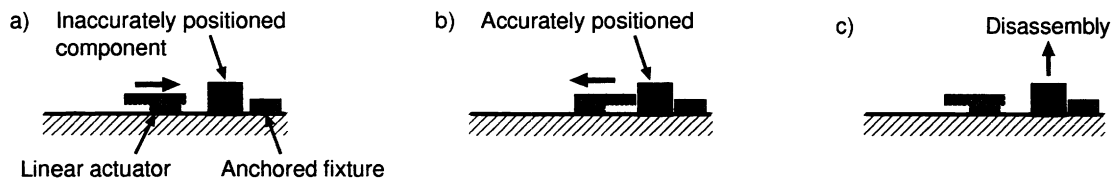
Precise component positioning and release with a on-substrate linear actuator and a fixture. (a) inaccurately positioned component; (b) accurately positioned component; (c) release of the component for disassembly.
